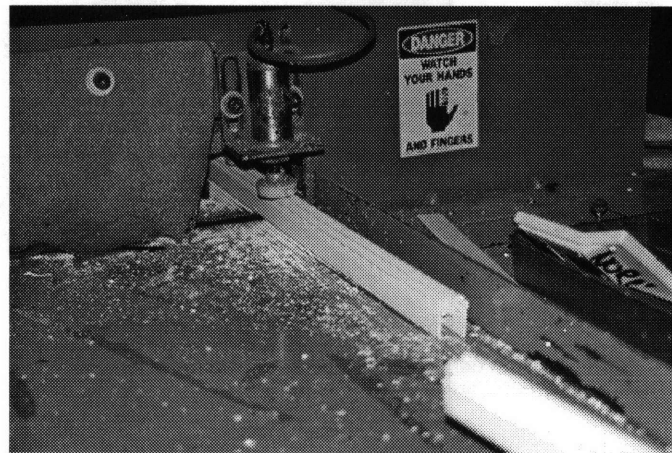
With the extrusion cool enough to touch, an automated saw cuts the extrusions to desired lengths.
